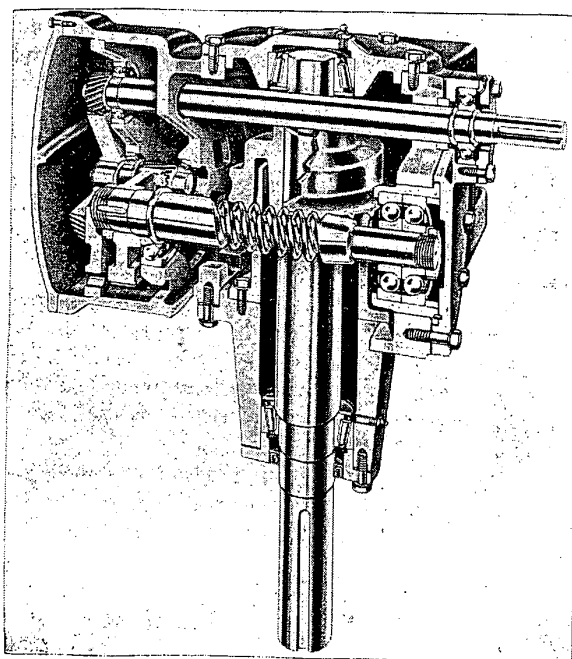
Double-reduction unit with a worm second reduction. Typical of high-ratio units used to drive conveyors. (Courtesy of Philadelphia Gear Corp.)
